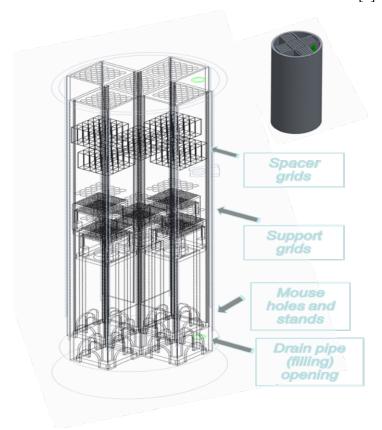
DPC Mockup (Based on 5 × 5 Bundles) of the Lower Section of the Real Canister, Including Mouse Holes, Supports, Lower Assembly Grid, and One Spacer Grid.
